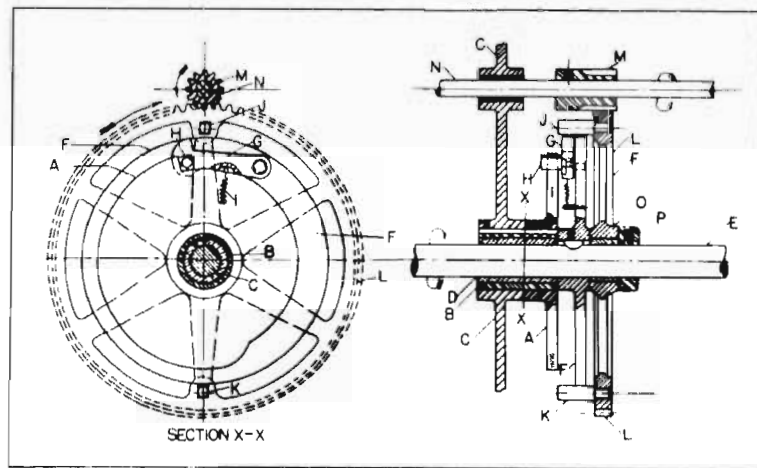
Mechanism which imparts a one-half revolution to a driven shaft for a one-half revolution of the drive-shaft and then holds the driven shaft stationary as the drive-shaft completes its revolution.
